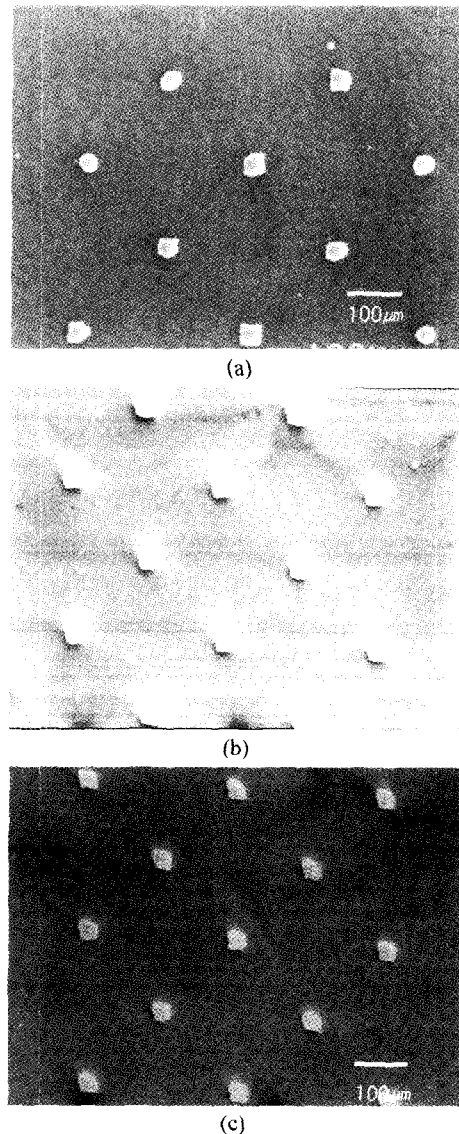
The SEM images of solder bumps reflowed at 150°C. (a) Ag/In solder bumps. (b) In/Ag solder bumps. (c) In/Ag/In solder bumps.
